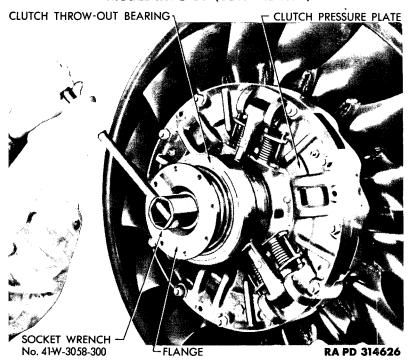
Removing Clutch Spindle Flange Retaining Nut
